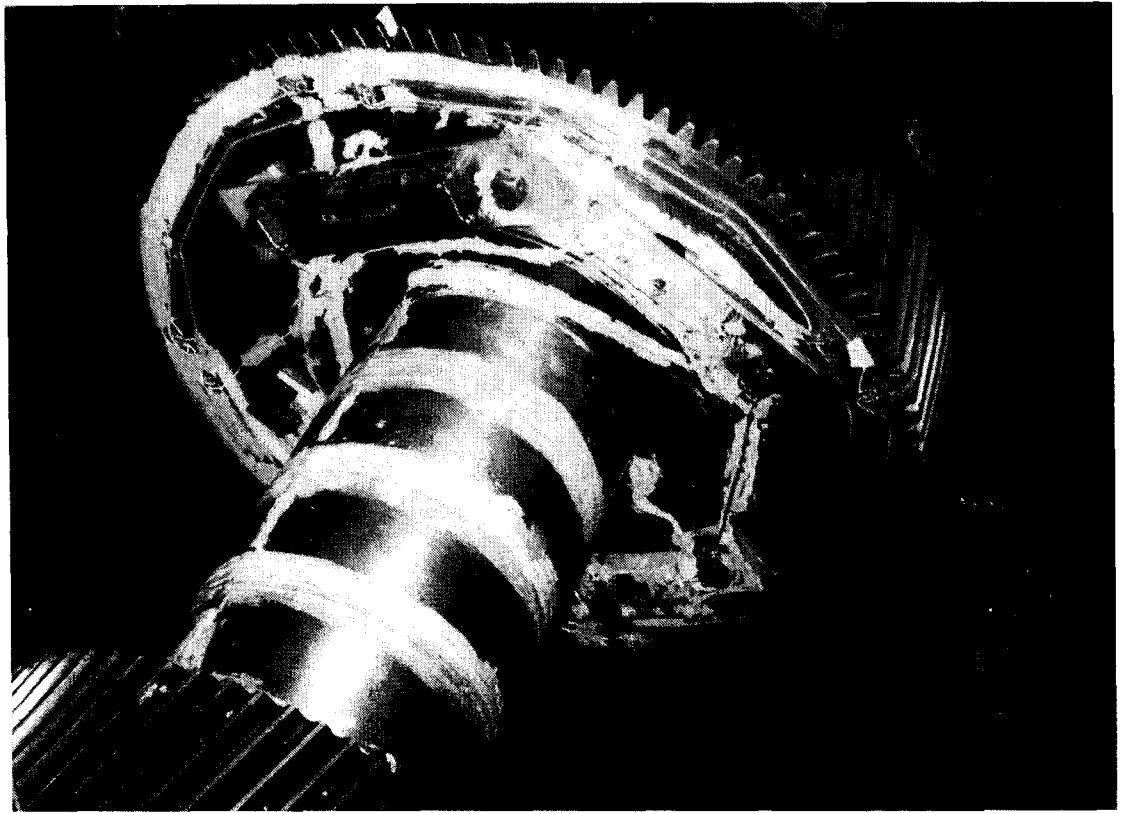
STAGE IN THE INSTRUMENTATION OF GEAR WHEEL.
